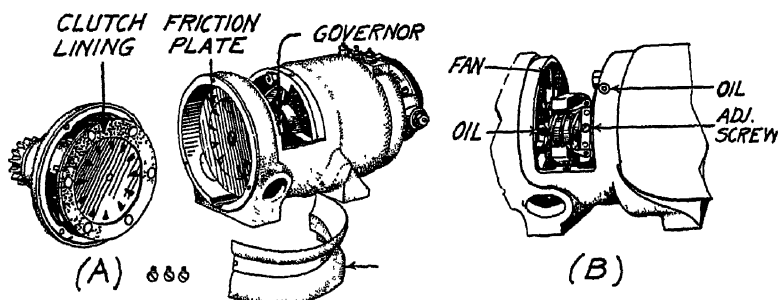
Gray and Davis generator, Type C-1, regulated through mechanical governor. (A) Showing clutch disassembled. (B) Internal view of governor.
